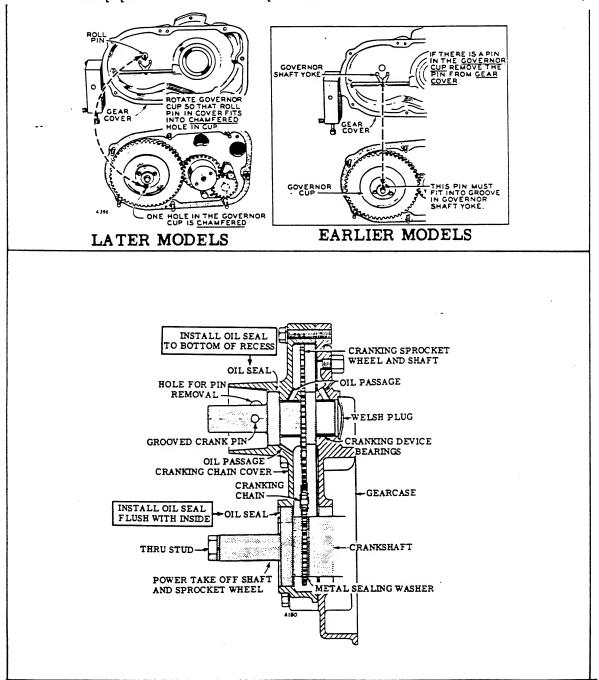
INSTALLING THE GEARCASE AND CHAIN COVER
